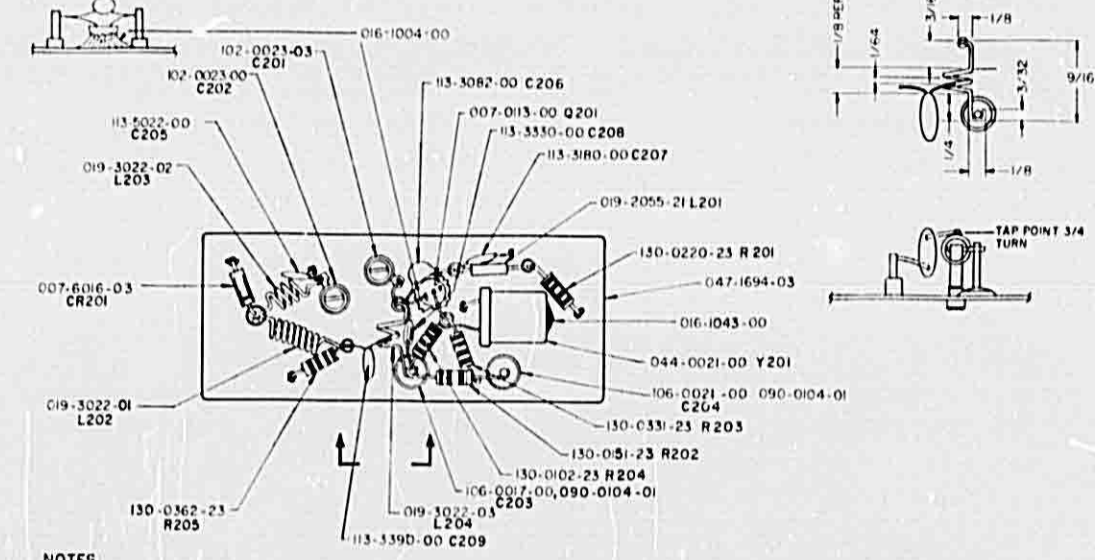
SWITCH BOARD ASSEMBLY
